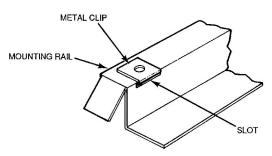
Remove Metal Clip on GE Metal Sleeve
